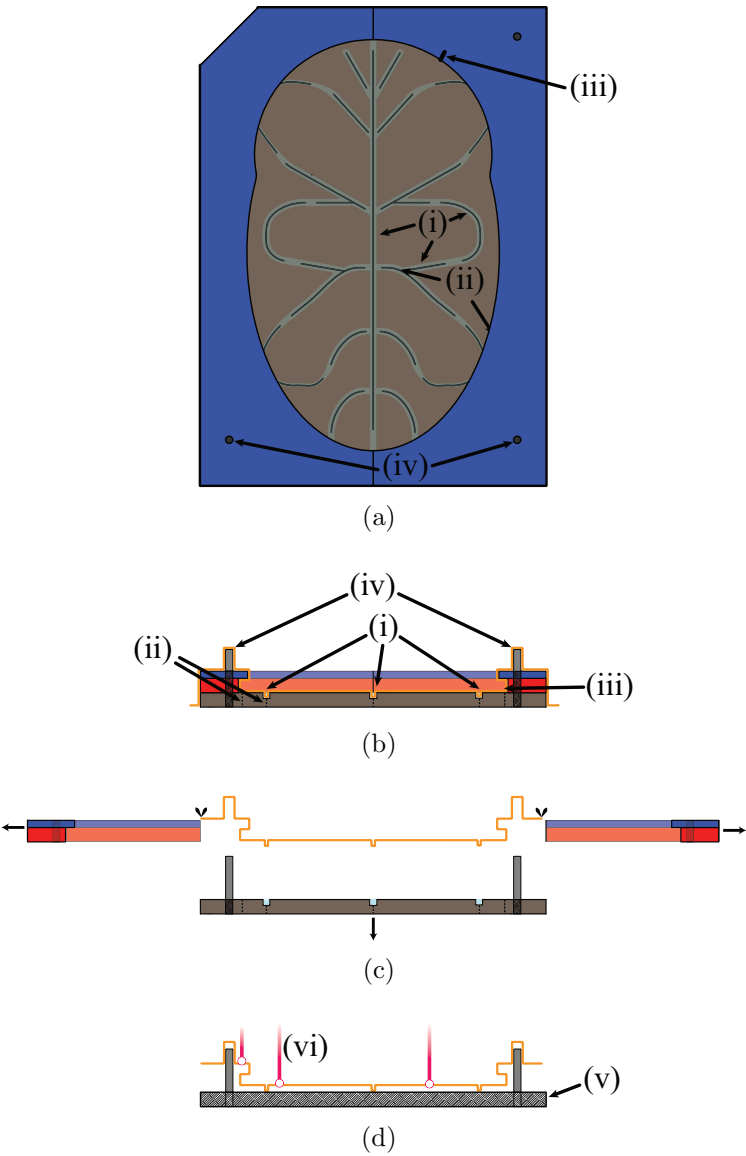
Bottom structural shell manufacturing process: (a) Overhead view of multi-layer laser cut mold. The pattern in the bottom layer will form the structural ribs (i) and thin cuts provide vacuum feed (ii). The top plate of the mold forms the undercut lip feature (iii). Alignment pins (iv) are added to stack up the mold layers. (b) Cross section view of thermoformed plastic shell in mold, where the undercut lip (iii) formed by separate layers of the mold is shown. (c) To release the formed shell, the shell is roughly cut around the top layer of the mold, the base plate with dowel pins is pulled downwards, and the top two plates defining the undercut lip are pulled outward. (d) The roughly cut shell is aligned to a fixture plate (v) for laser cutting which duplicates the alignment pin pattern as in the stack-up above, and then holes for legs and final outline release cuts are made (vi).
